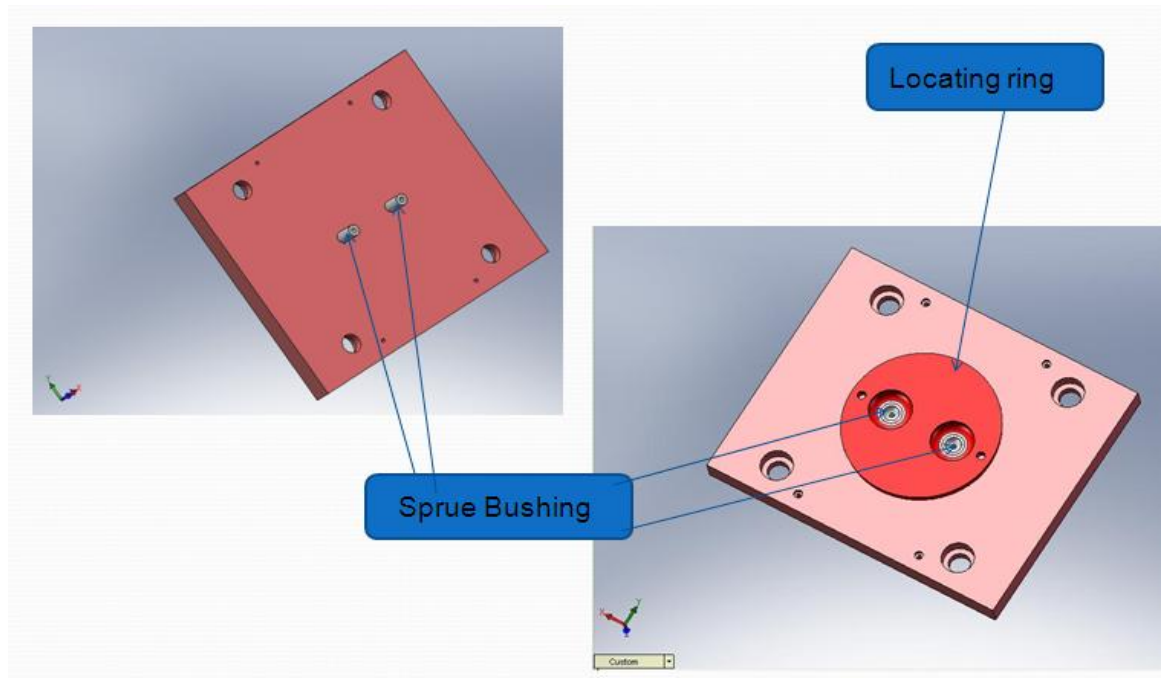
Top Plate with the Locating Ring and Sprue Bushing
